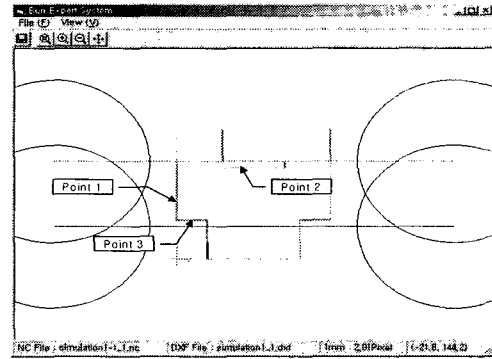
Generation of multi cutting path for face milling the workpiece with the shape of polygon.
